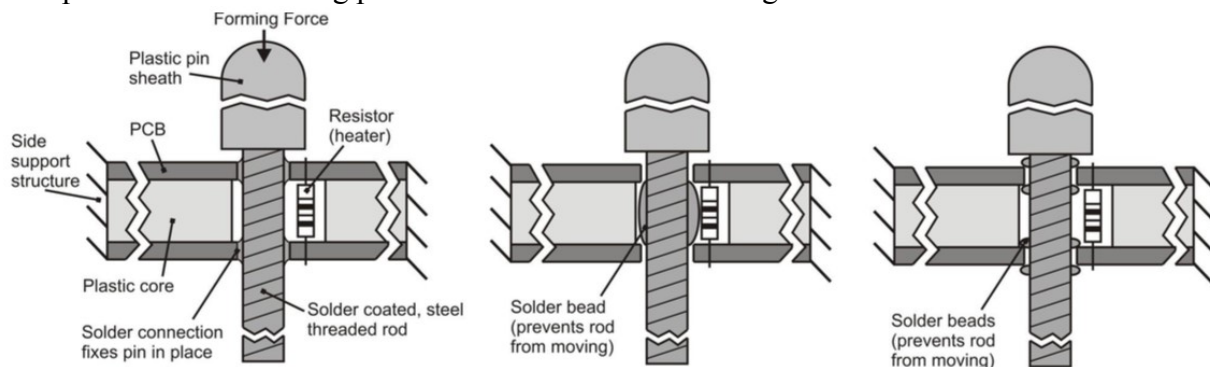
Solder braking method. When solder is heated, the rods translate up and down. When no heat is applied, the solder either connects to the PCB or clumps, causing a brake. Image credit: Design and Fabrication of a Digitally Reconfigurable Surface. <http://www.bn timers.com/digitally-reconfigurable-mold.html>
